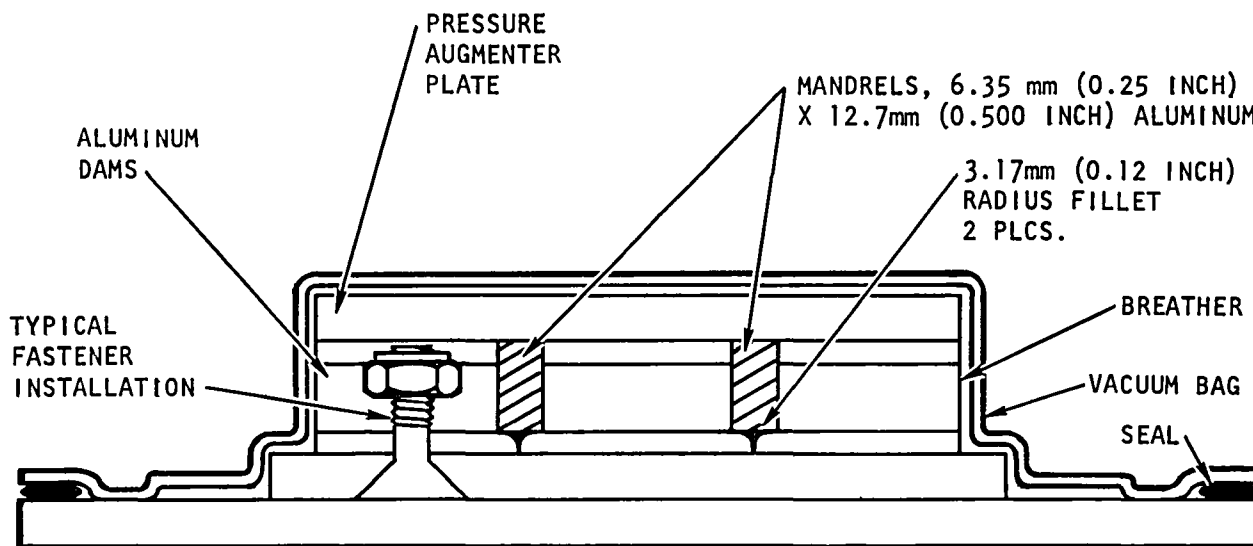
Fillet Radius Stock Tooling and Vacuum Bagging Arrangement - Imidizing Process
